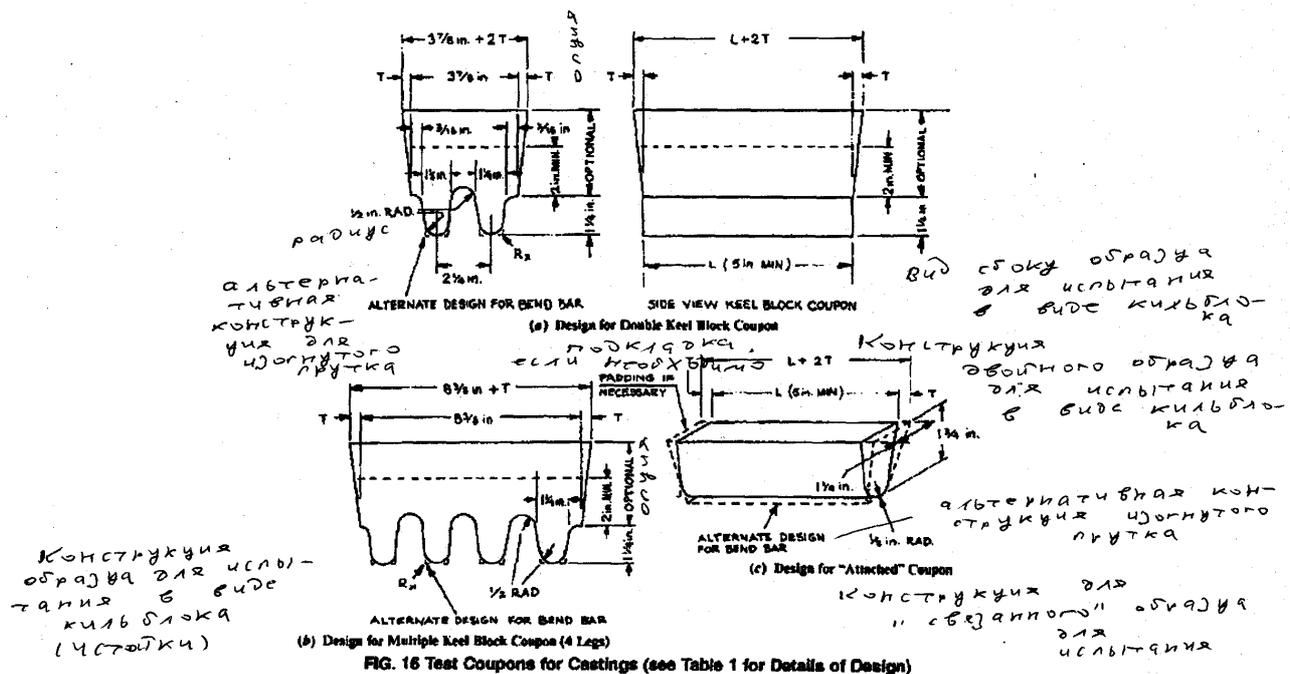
Test Coupons for Castings (see Table 1 for Details of Design)
